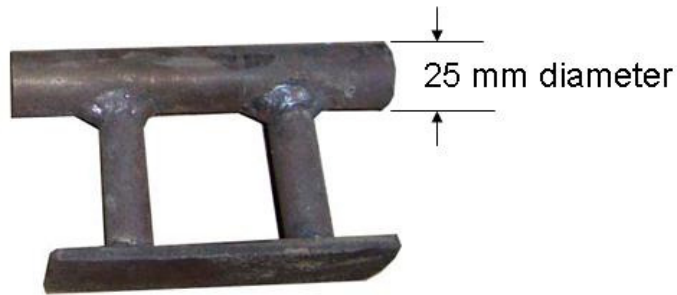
Jig to cut a piece of 1,575 mm length from 50 mm X 25 mm section for chassis
